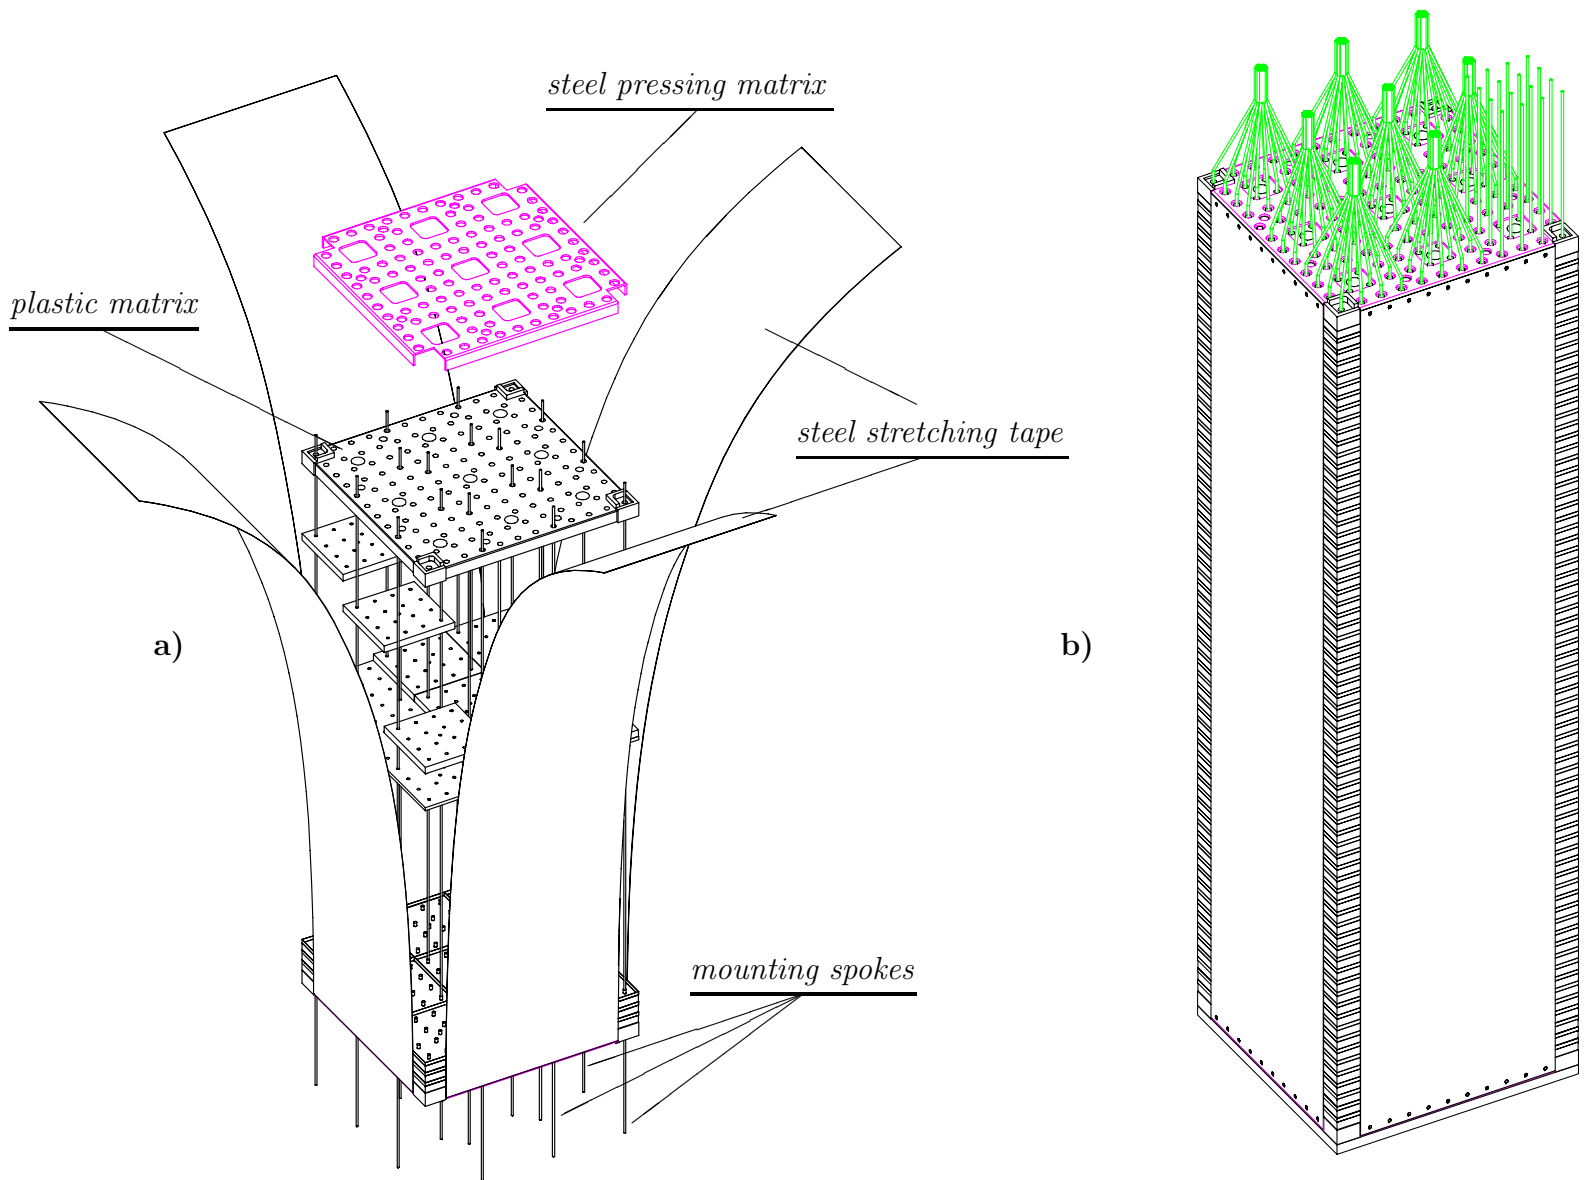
Assembly of the inner section module. Shown are a) the Pb/Sc stack during assembly, and b) the assembled stack with welded tape and inserted fibers. For more details see the text
